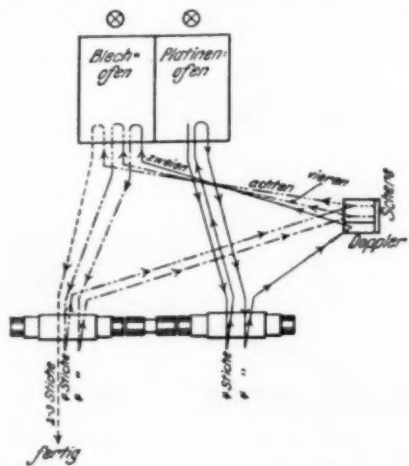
GERMAN DOUBLE MILL FOR OLD FIVE-HEAT PROCESS. SHEETS $20.87 \times 29.92 \times 0.0079$ IN. SHEET BARS 9.84×0.472 IN., ROLLED SINGLY
